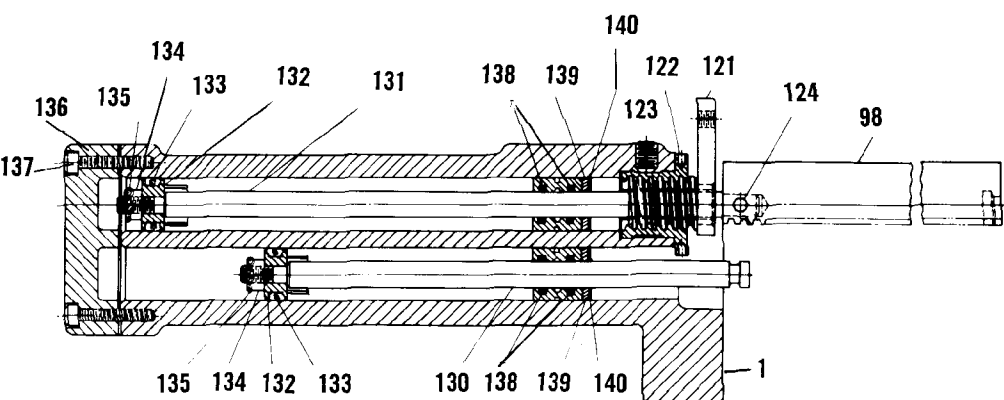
Sectional View of Cylinder and Piston Rod Assembly in Cylinder and Selector Valve Housing.
